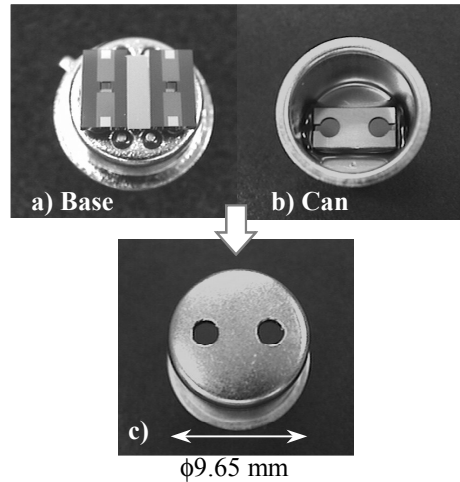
Photograph of the infrared detecting module, a) base, b) can and c) top view of the TO-5 package after cold welding.
